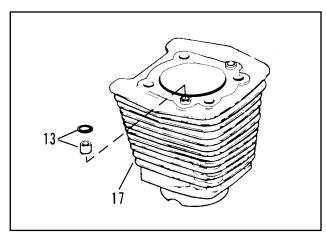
88 cid Cylinder O-Rings and Inserts
